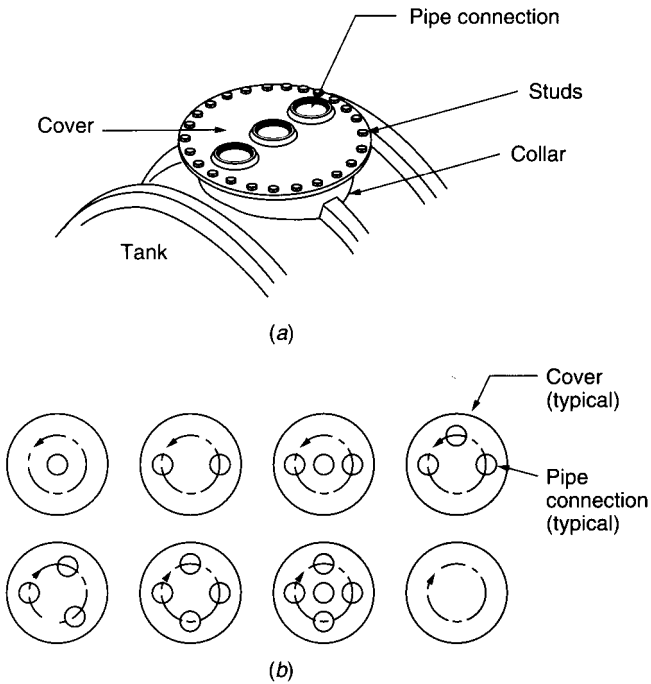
(a) Typical manway into FRP tank with multiple piping connections. (b) Typical manway cover fitting configurations. (Courtesy Xerxes.)
